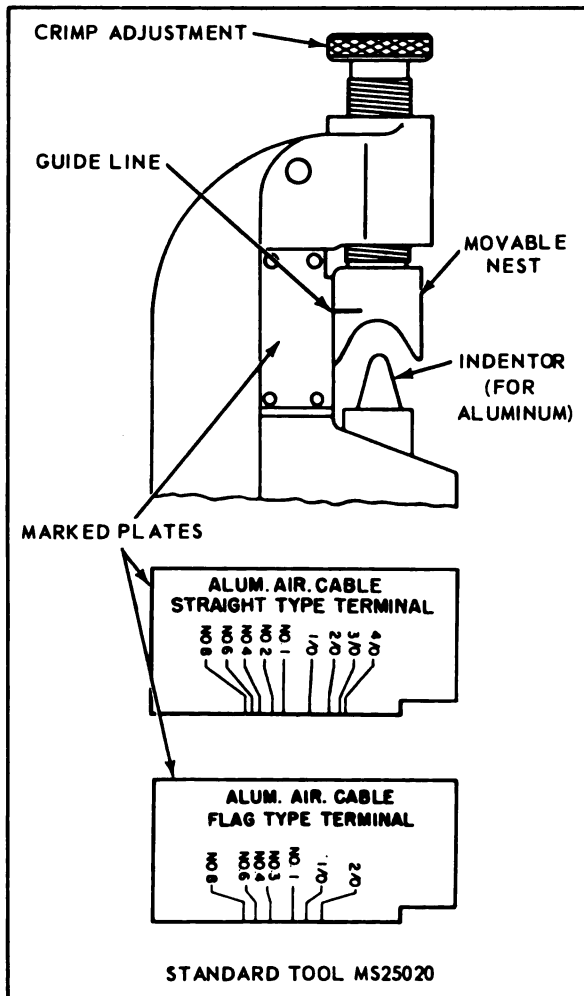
Tool-Hand Crimping-Aluminum Terminal Lugs
